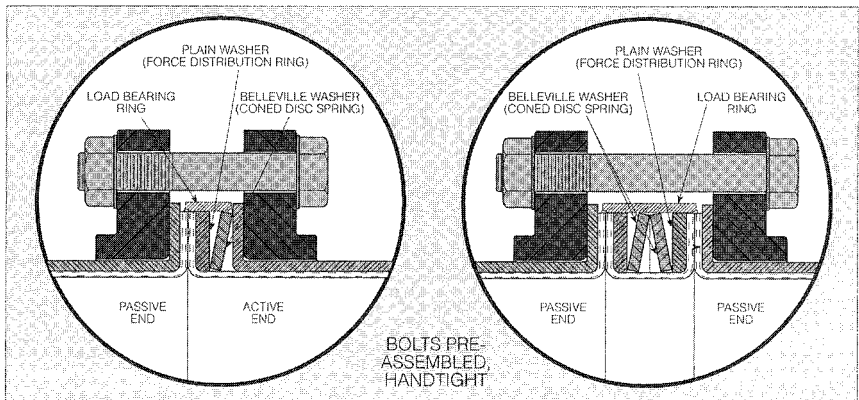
High integrity flange connection. (Courtesy of Crane Resistoflex)
